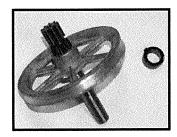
Turn drum assembly over and complete tightening of bolts.
